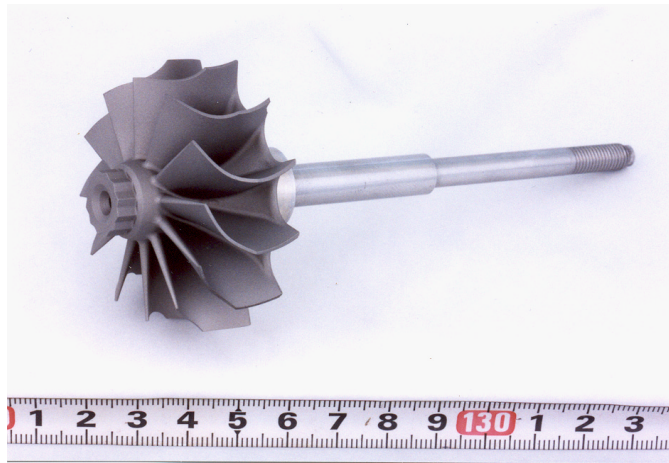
High Nb content γ -TiAl turbine wheel casting and complete assembly of automotive turbocharger by Mitsubishi (67). Courtesy of Mitsubishi Heavy Industries.
